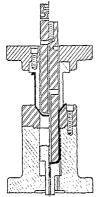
Double-action redraw die for beveled bottom corner cups.¹
